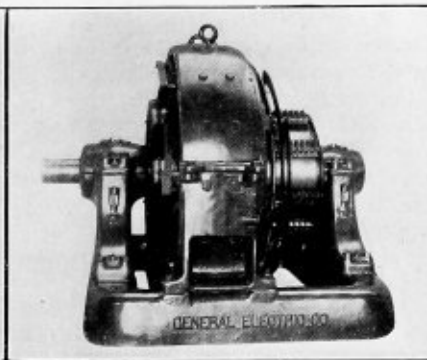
200-Ampere Portable Arc Welding equipment
